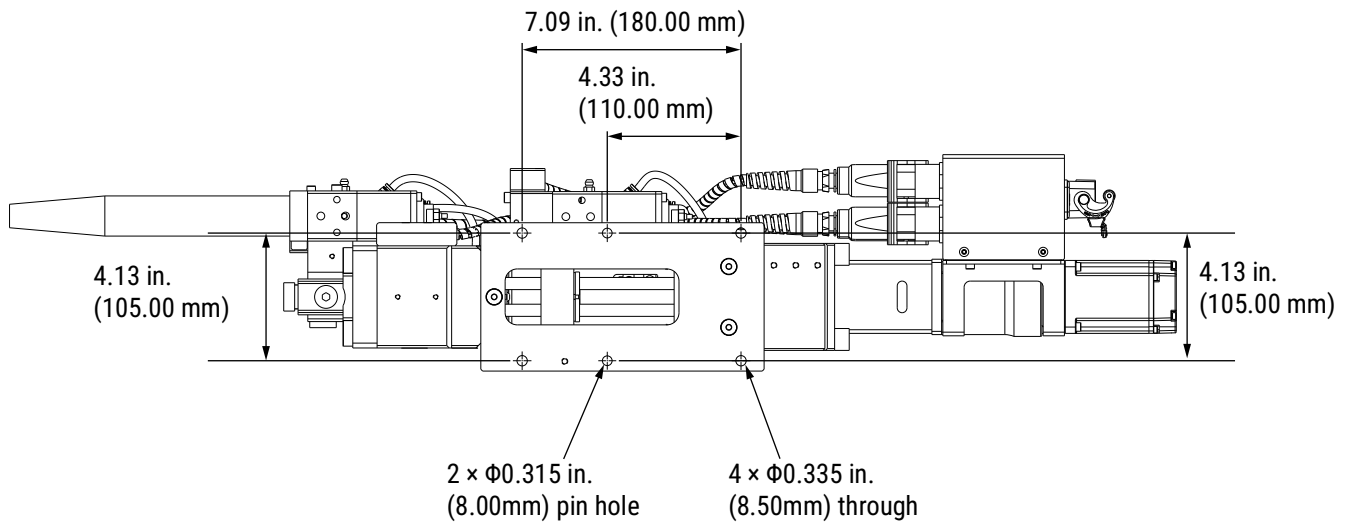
Mounting Hole Dimensions for Installing the PSM Warm Melt Metering Unit - 100cc
